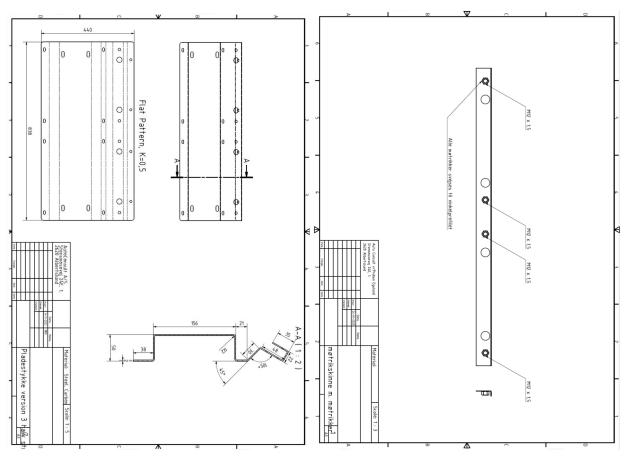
Seat anchoring construction layout, part 1 - plate construction
